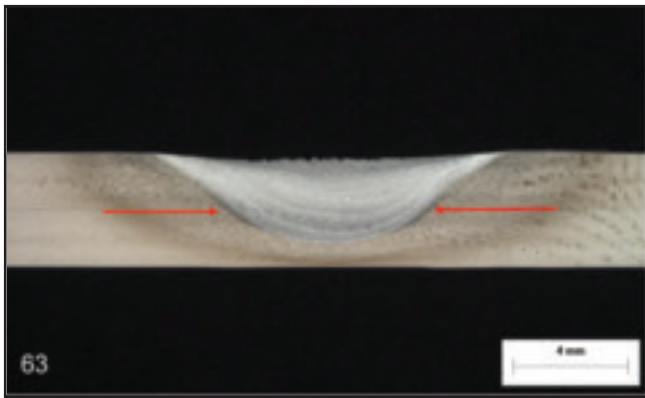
Cross section of a single-side CHRSW lap joint on 2-mm-thick 7075-T6 Al.
